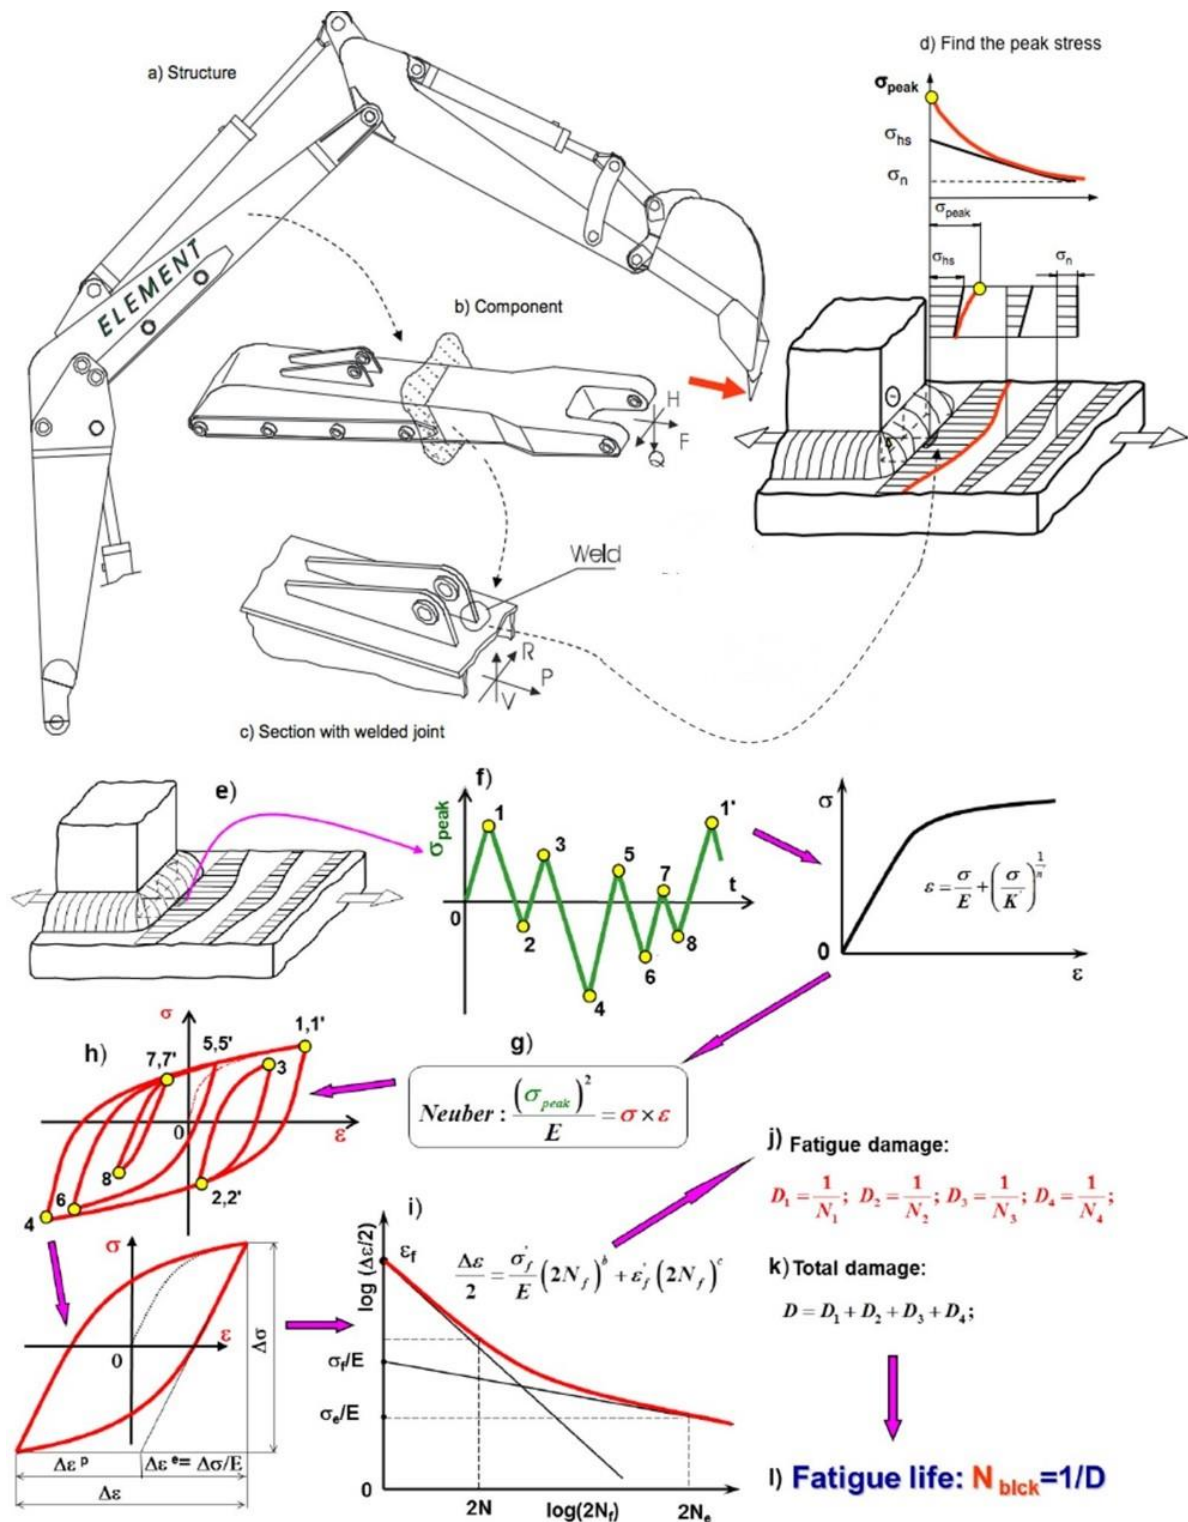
Steps in determining the fatigue life of weldments using the ϵ -N method [3]
